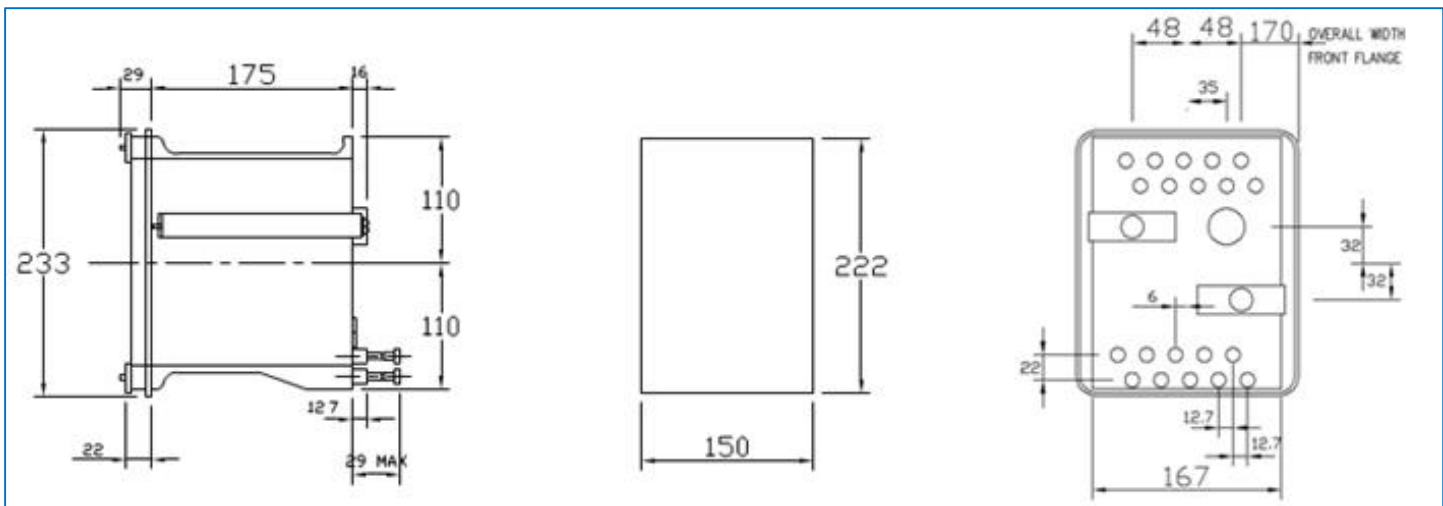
Case and panel cut-out dimensions for case 1D (all dimensions in mm)
